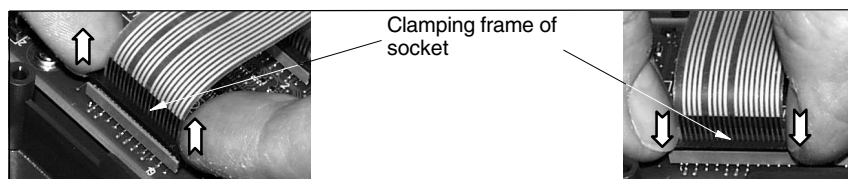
Removal (left) and attachment (right) of a membrane connector (example shows OP 012)
